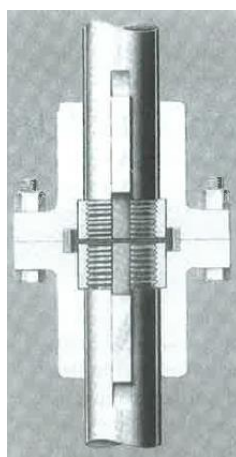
Flanged shaft coupling (Bloch & Budris, 2010, p. 306)
